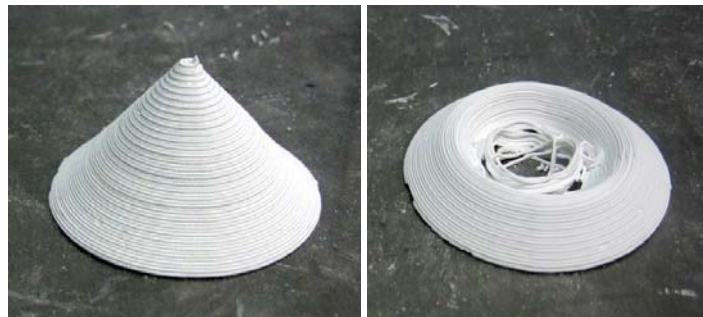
A successfully built cone (left) and a collapsed cone (right)
